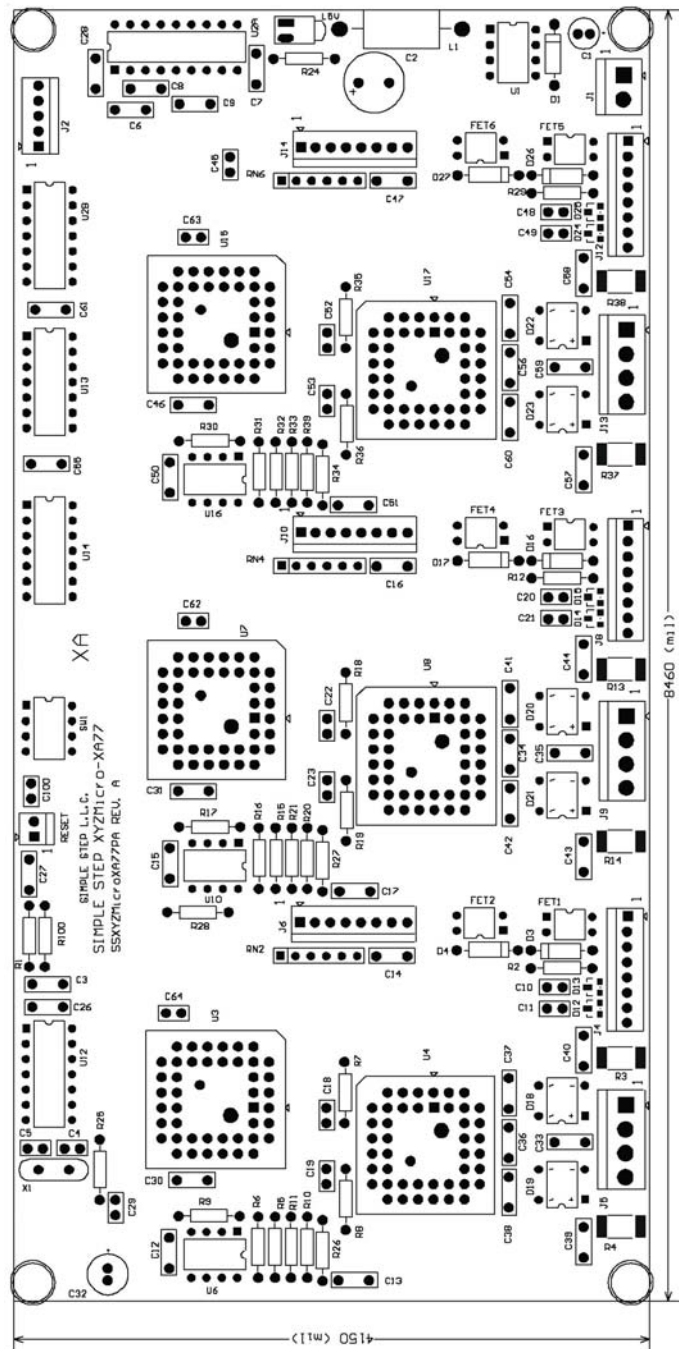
SSXYZMicro77 Board Mounting Hole Outline
